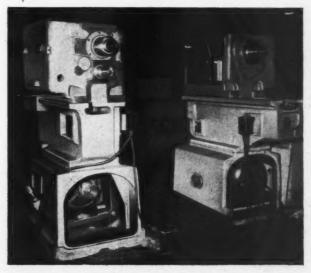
Stands for testing and running headstocks for IMOR lathes after assembly. The stands are arranged so that both sets of controls can' be operated from one position
